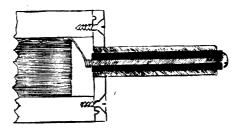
Section of front spindle, showing connection of armature wiring to the insulated central rod and stud.
